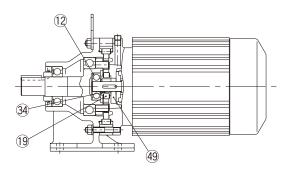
Type CHHM (Horizontal, Gearmotor), 2 Stage Reduction (Example: Frame size 6185DA)
